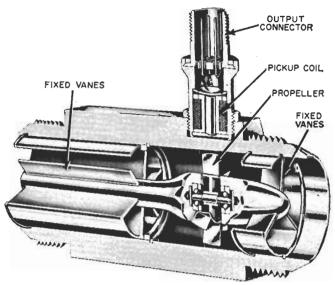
Cutaway drawing of typical small turbine flowmeter.
